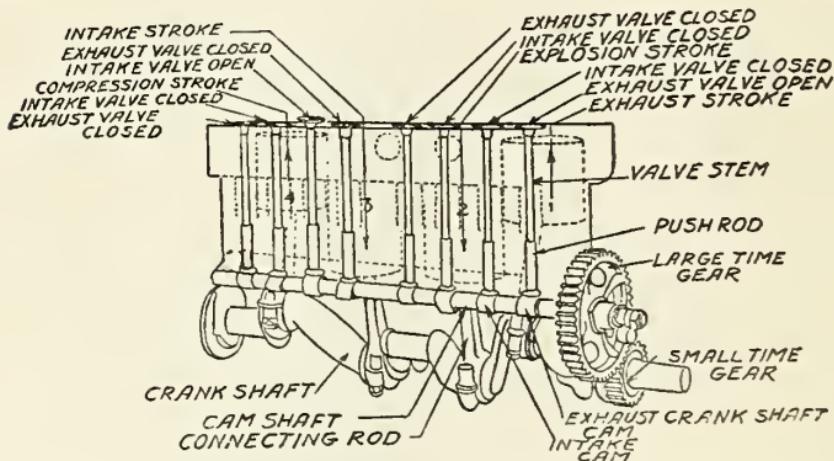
Timing gears, cam shaft and valves of a Ford engine.
